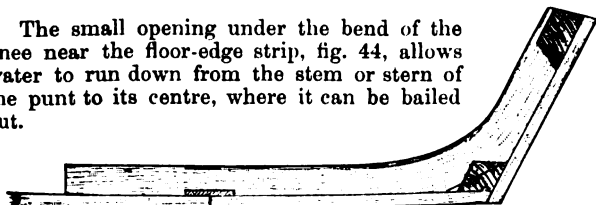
SECTION OF ONE SIDE OF PUNT, SHOWING A SIDE-PLANK KNEE FITTED
